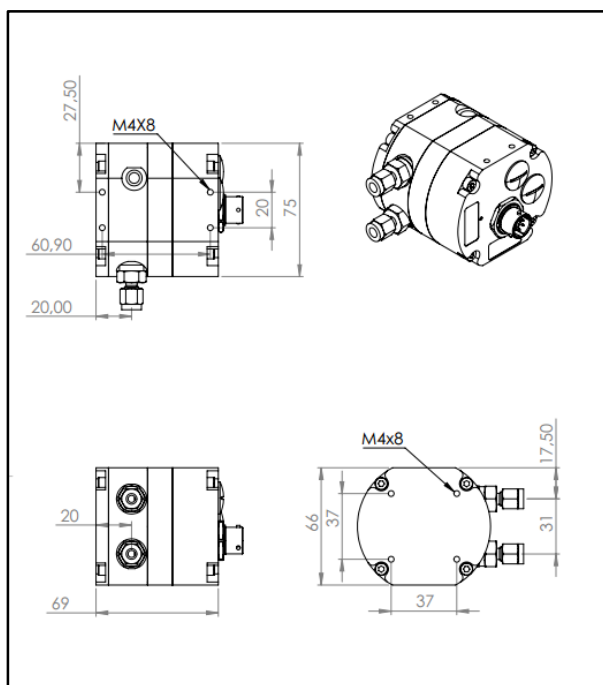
Dimensions and technical drawings of the MIRS8-T-V
